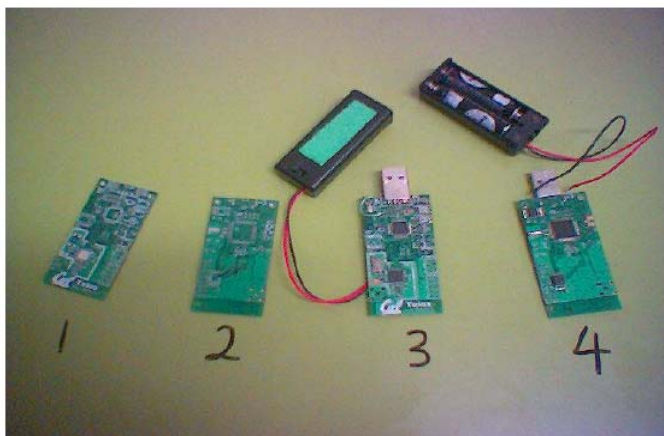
Telos Revision B. Before soldering (1, 2) & after soldering (3, 4)
